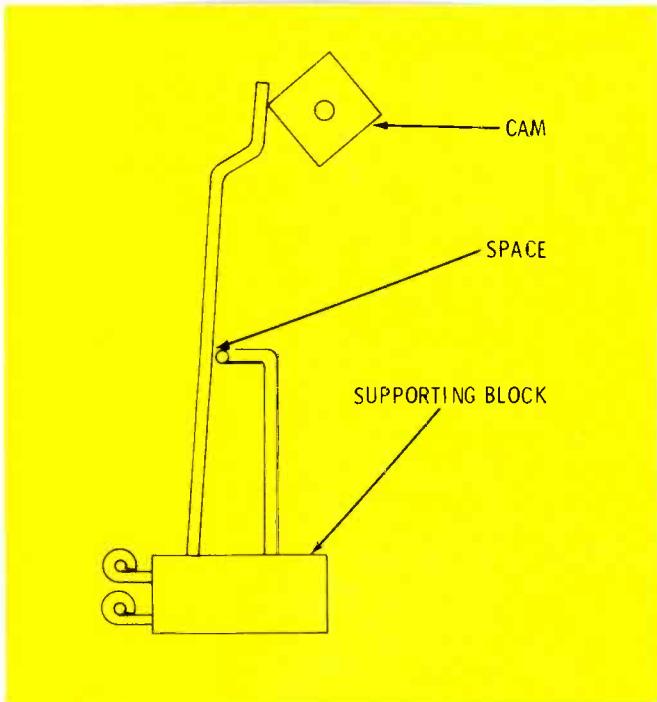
Drawing of cam-type of cassette-stop sensor mechanism.
